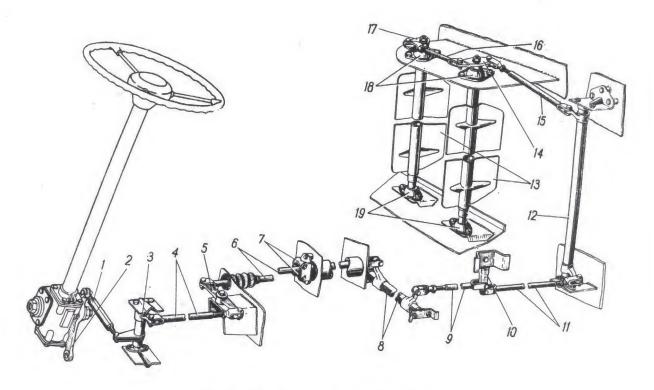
RUDDER STEERING CONTROL LINKAGE
